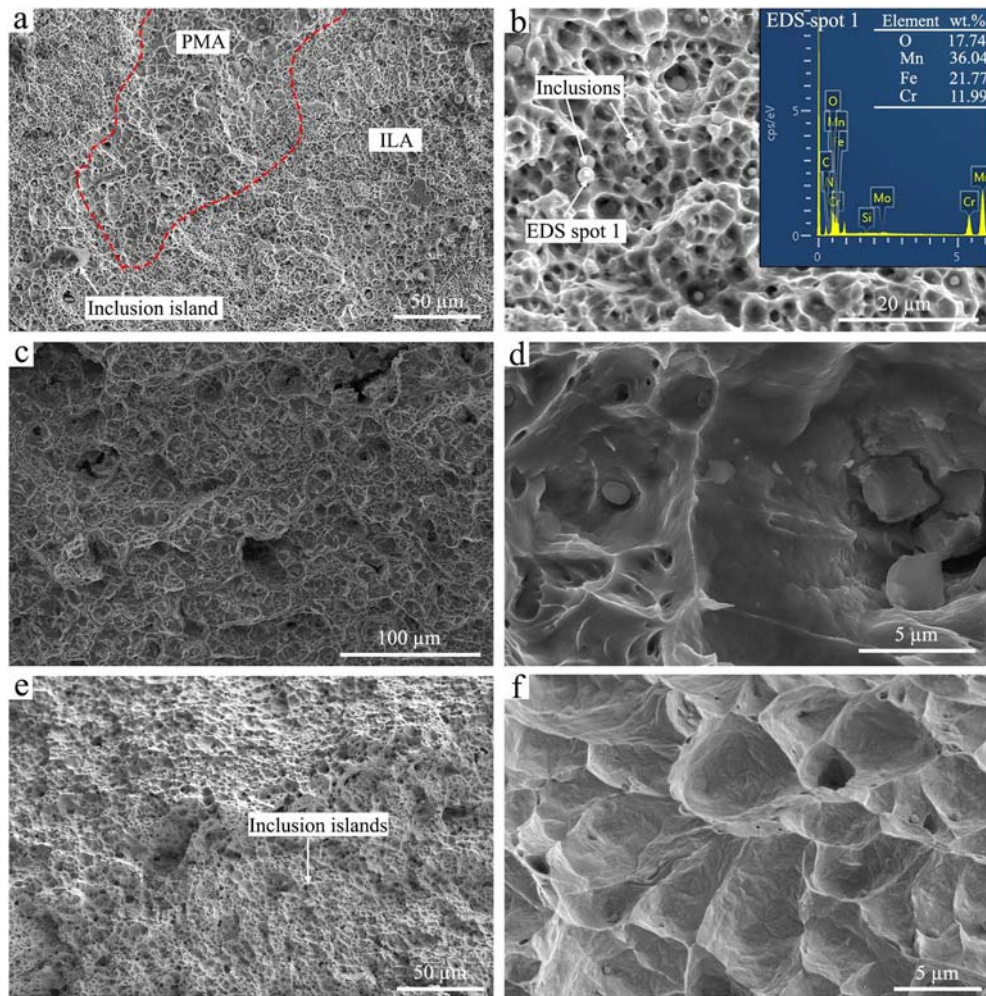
Tensile fracture surfaces of VD samples: (a,b) as-built, (c,d) T2-1050, and (e,f) T2-1100 conditions.
